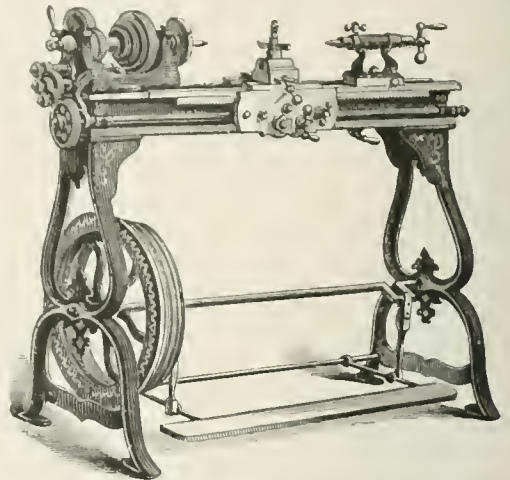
Screw-cutting engine-lathe, with foot-motion.
